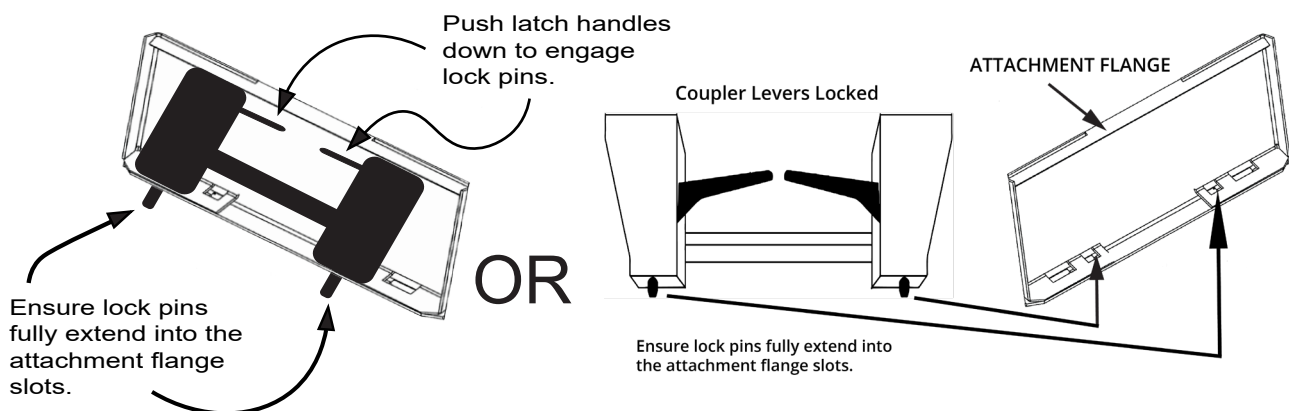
B QUICK ATTACH COUPLER LOCKED TO ATTACHMENT BRACKET
